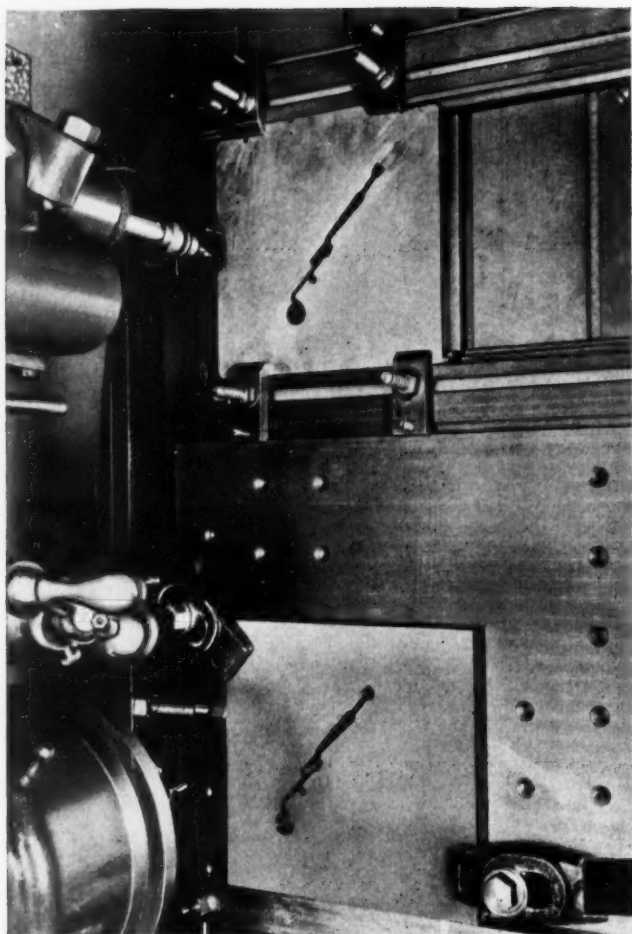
Many Dies are Milled on Keller Machines because the Delicate Cutters can be Run at the Required Feeds and Speeds without Breakage
